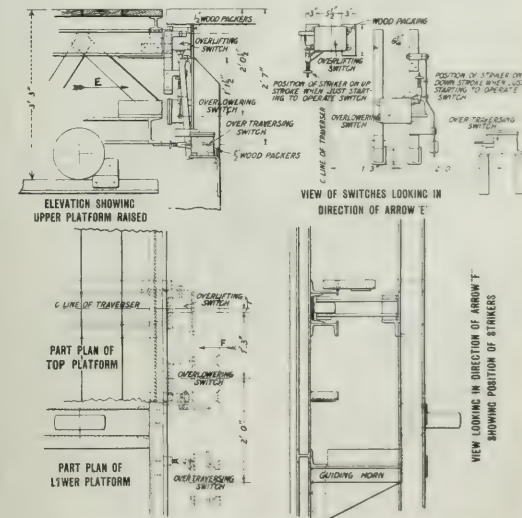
ARRANGEMENT OF OVERLIFTING, OVERLOWERING AND OVERTRAVERSING SWITCHES FOR ELECTRIC TRAVELLER.
